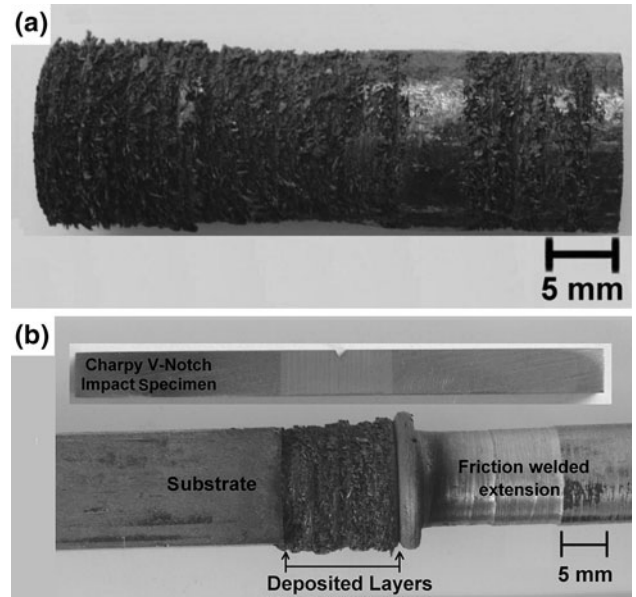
Photographs of friction-deposited cylindrical samples produced for tensile (a) and impact (b) testings
